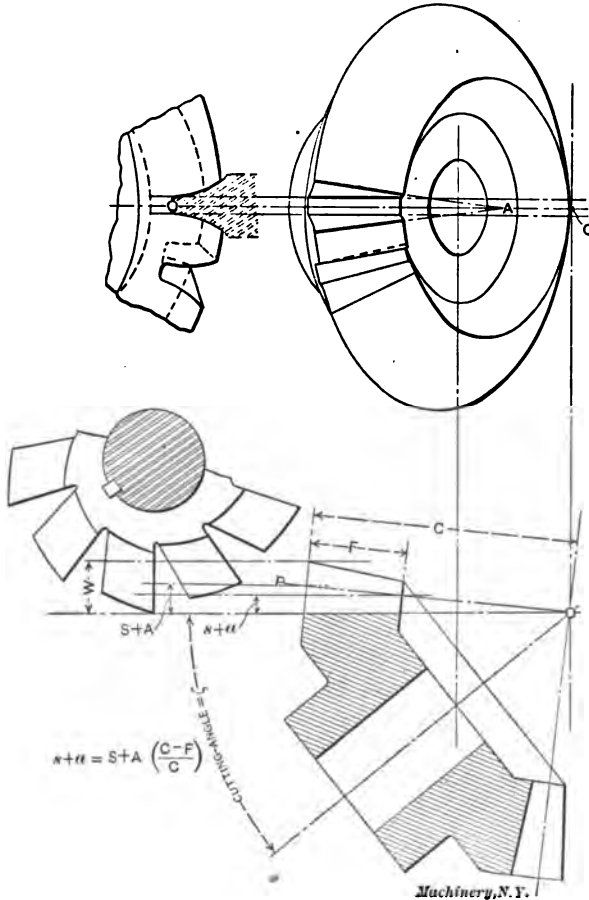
Relative Positions of the Formed Cutter and the Blank when Taking a Central Cut
